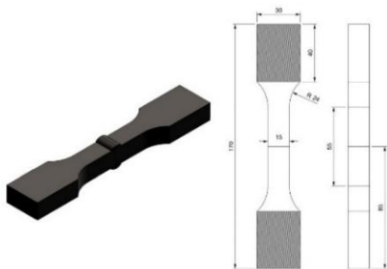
Geometry of the butt-welded dog-bone specimens for tensile tests.
